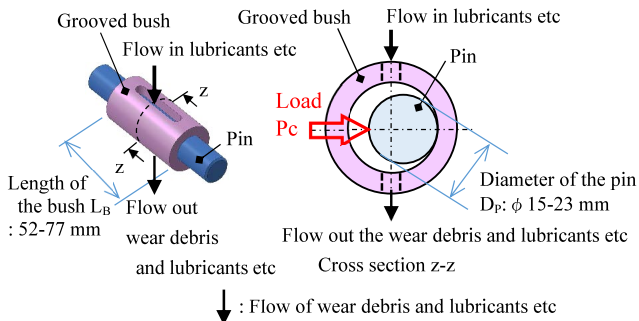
Grooved bush to remove the wear debris and lubricants. (Online version in color.)
